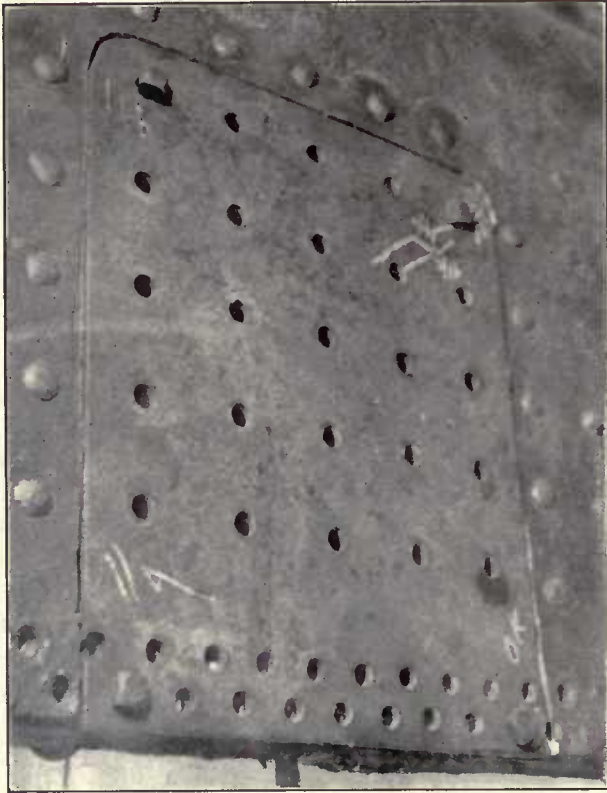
Defective Part of Sheet Removed and Patch Fitted in Place.
